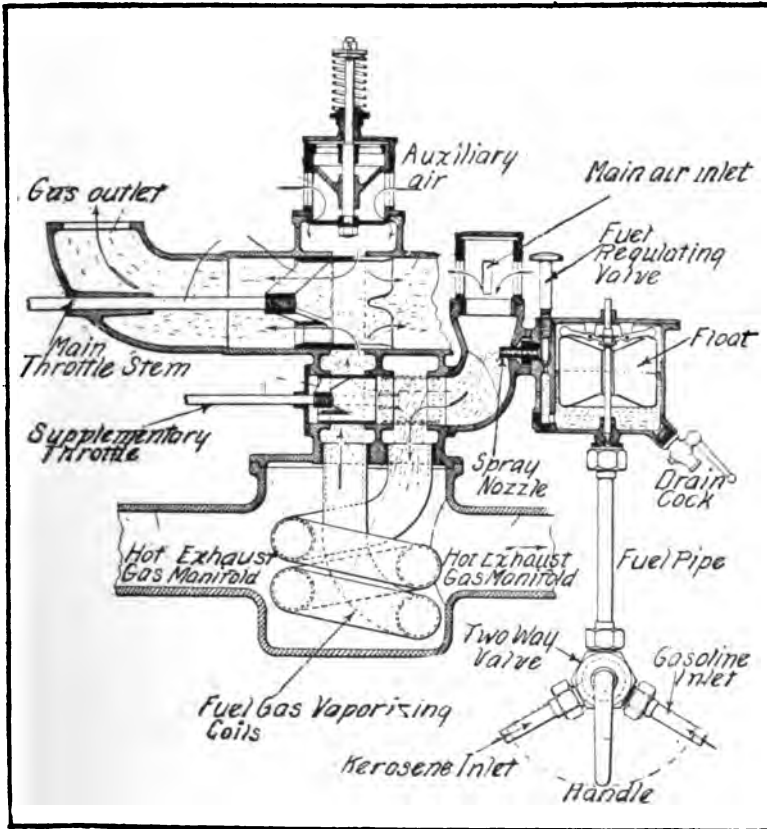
Sectional view of Woolsey two-fuel carburetor, which is adapted to vaporize either gasoline or less volatile fuels, such as kerosene.
